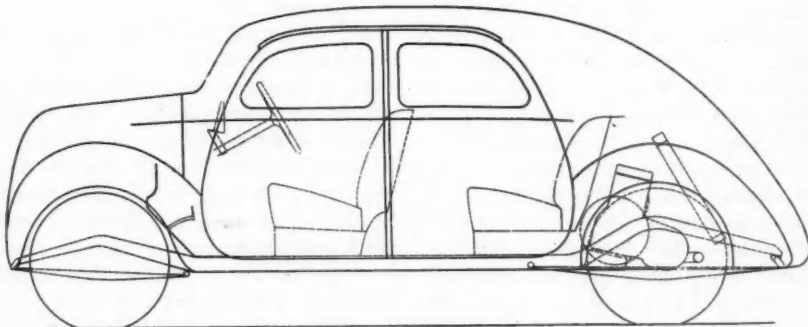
Rear-engined car with transverse six-cylinder engine ahead of the axle
